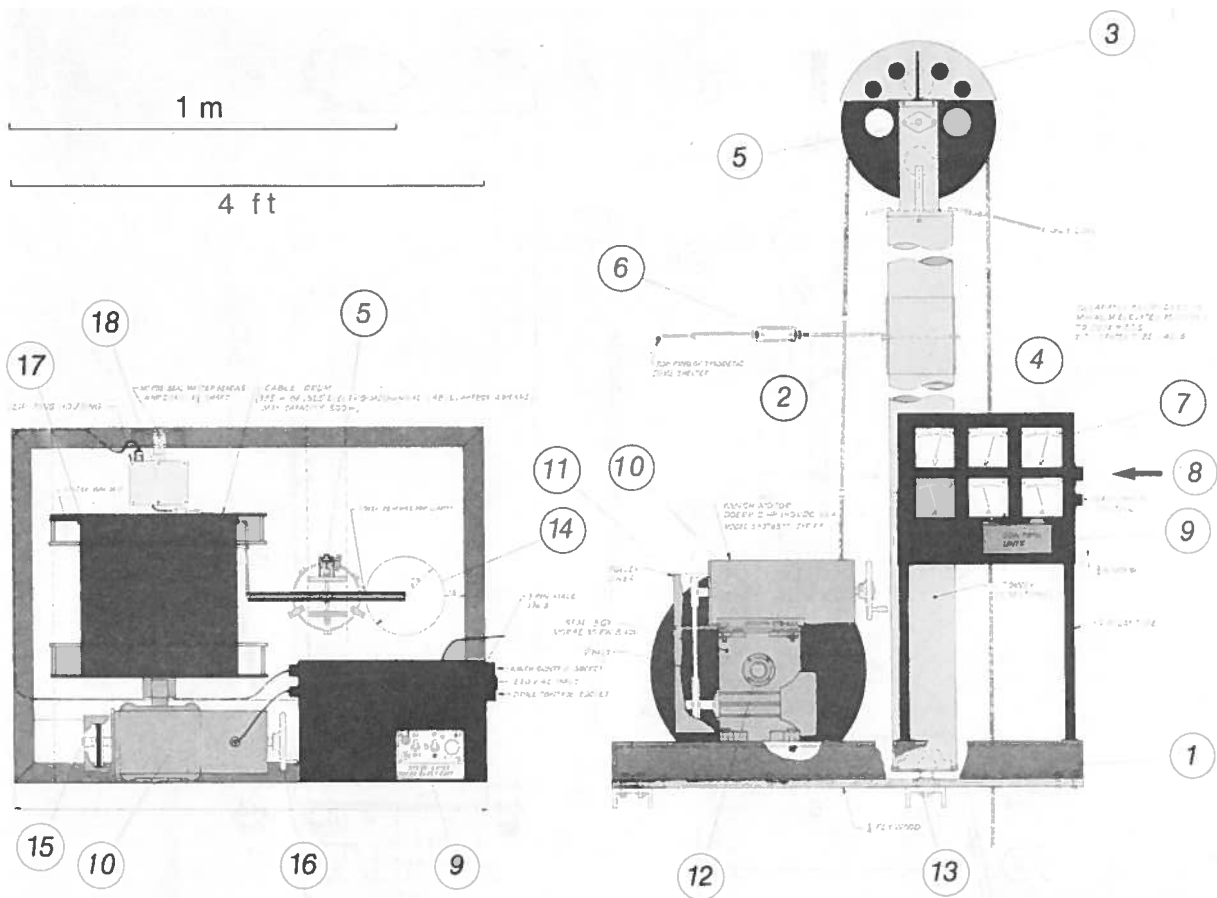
Winch, tower and drive assembly. (1) Base plate, 4' x 3' (1.22m x 0.91m) constructed from aluminum channel with a ply-wood base containing a drill access hole. (2) Aluminum tube tower, 6.625" diam (16.83cm) in two sections joined by an aluminum collar fitted with four lugs at 60° and 120° which enable connection to the top ring of the geodesic dome for stability. Guy lines from the top of the tower are not necessary under normal conditions. (3) Pulley belt cover. (4) Electro mechanical cable (Rochester Corporation, number 7-H-325A, 0.313" (0.80cm) diam. 7 conductor. Length approximately 270 m. (5) Position for multi-pole switch for counting pulley wheel revolutions. Electrical conductor is fed through center of tower to digital counter on control panel. (6) Hook, rod and turn-buckle linkage to top ring of geodesic dome (four connections). (7) Power conversion unit and control panel with ammeter/voltmeter pair for input power, winch and drill motors. (8) Input power from generator (220 V AC at 3.5 KW). (9) Motor controller (Doerr Electric Corporation, Wisconsin). SCR solid state unit with forward, reverse and neutral or brake positions. Separate units are used for winch and drill motors. (10) Winch motor (Doerr Electric Corp.). Permanent magnet, 2 HP, 180 V DC, 11.6 A, 1750 RPM. (11) V-belt drive with safety cover. (12) Gear case. Unit is a Morse 35RW-B, 40:1 reduction. (13) Ball assembly for support of tower base socket. (14) Drill access hole in plywood base plate. (15) Crank for manual turning of motor output shaft fits here. (16) Manually operated control wheel for low feed rates on the winch. (17) Cable drum with adjustable flanges (currently contains 270 m of cable) . (18) Slip ring housing for transmission of power to the cable and drill motor. Complete drill, winch and tower/dome assembly fits into 8 transit cases (not including generator) for a total shipping weight of 760 Kg.
